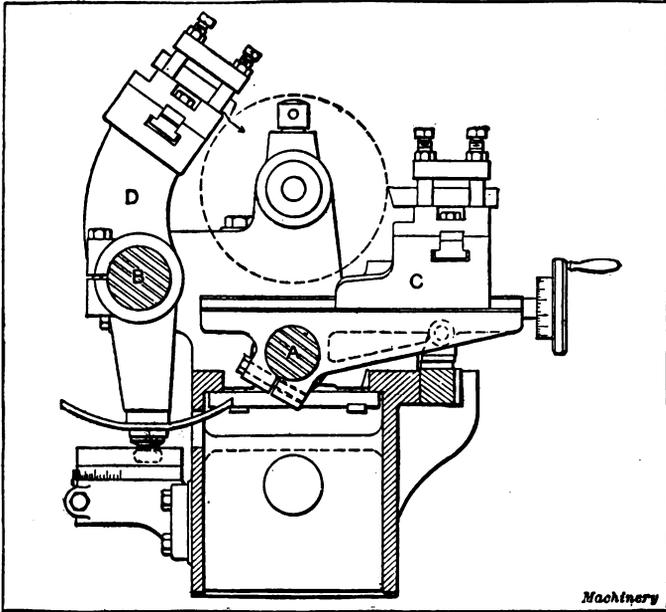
Cross-sectional View of Fay Automatic Lathe
